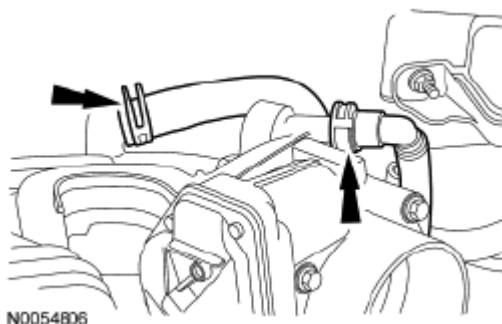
Locating Vacuum Hose & Evaporative Emission (EVAP) Tube
